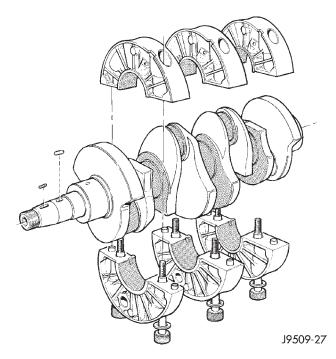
Crankshaft and Carrier Bearing Assembly INSTALLATION
